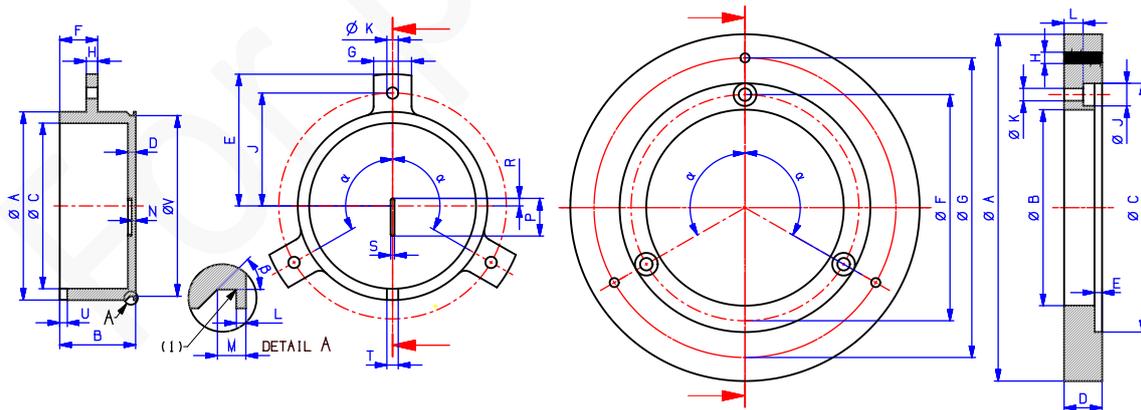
Test Fixture TUTF-PHJ65d-x — heat sink (left) and mounting ring (right)
